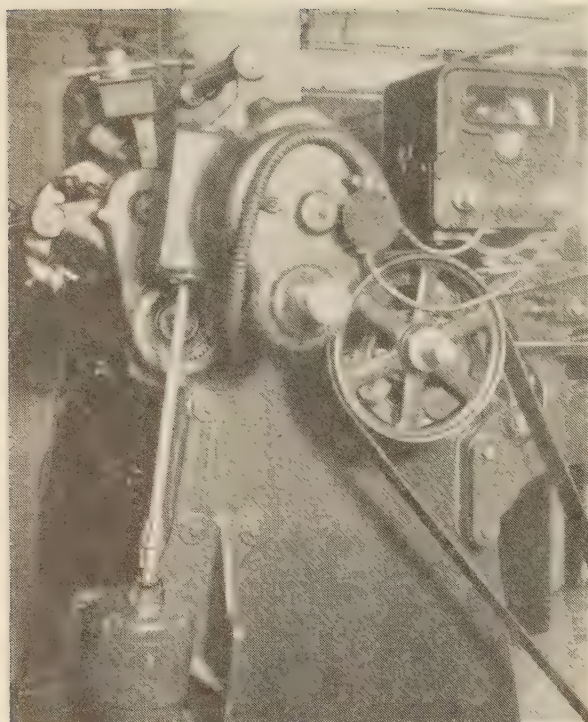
(a) MODERN PAPER CUTTER OR "SHEETER" WITH PHOTO-ELECTRIC REGISTER CONTROL
